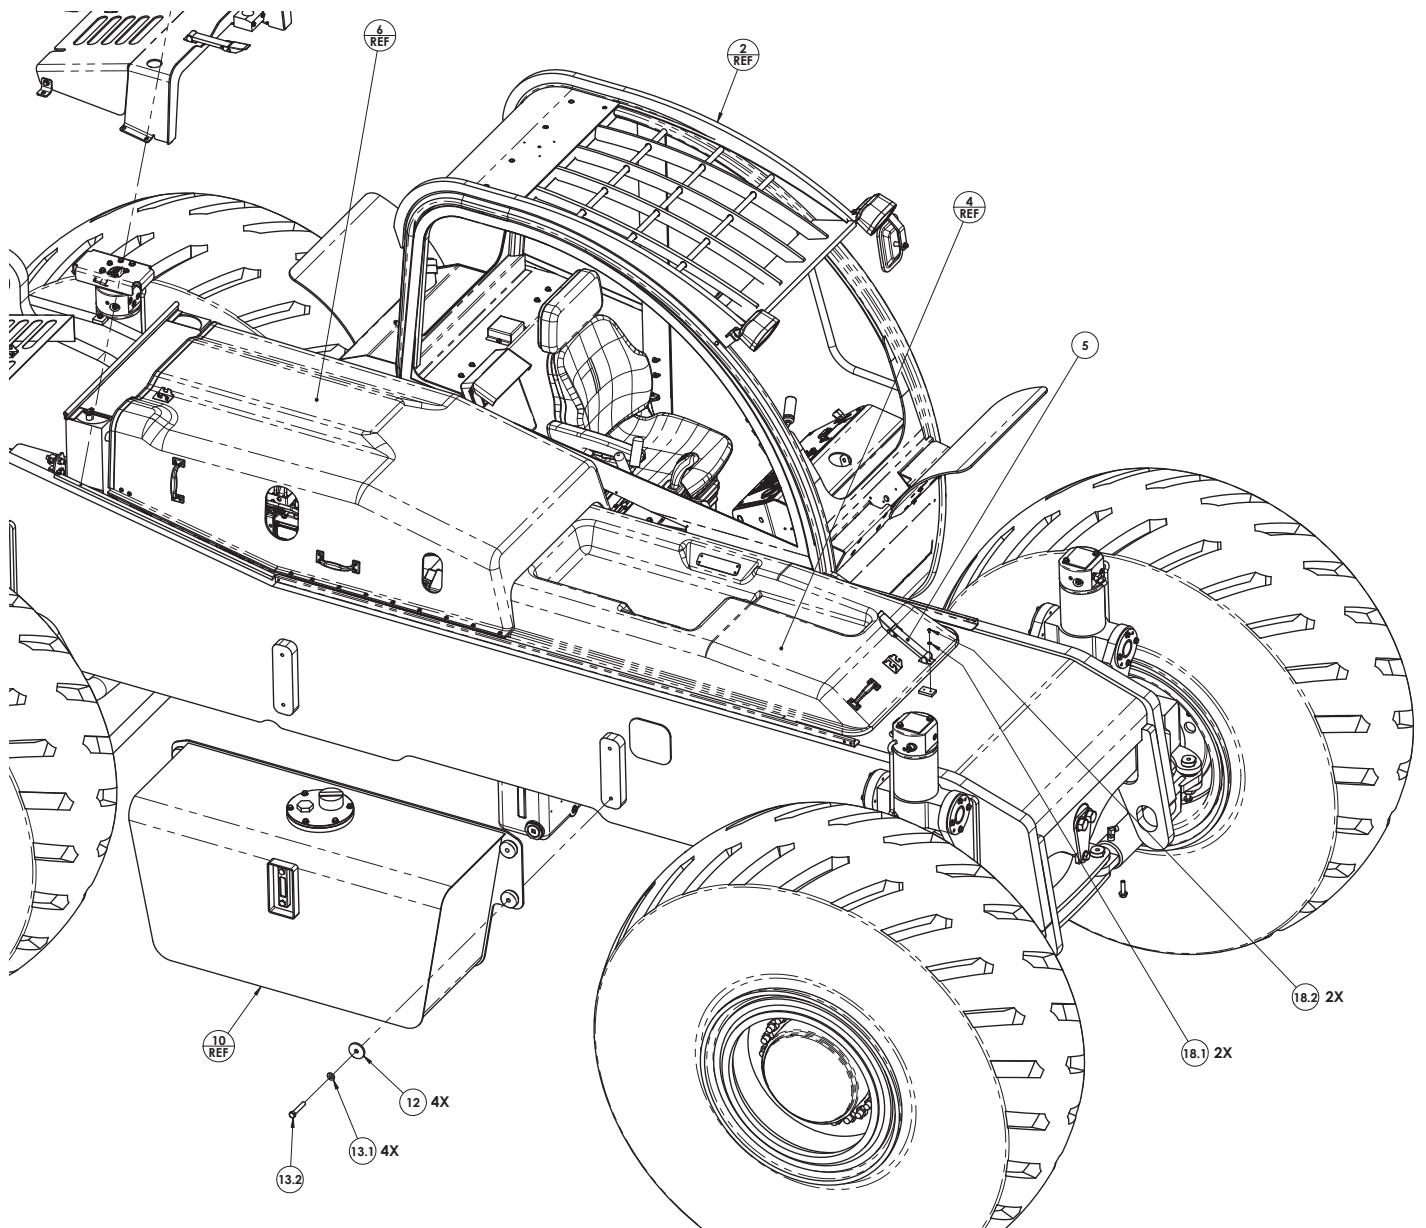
CHASSIS ASSEMBLY - CAB & COVERS (32002-000)
